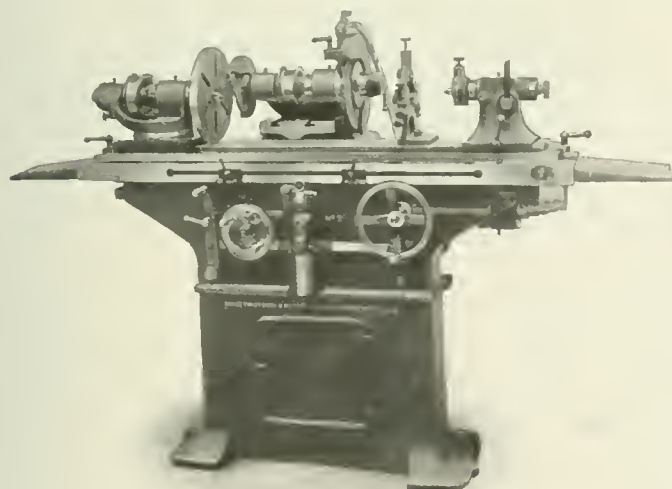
Twelve- by Thirty-inch Universal Grinder built by the Morse Twist Drill & Machine Co.
